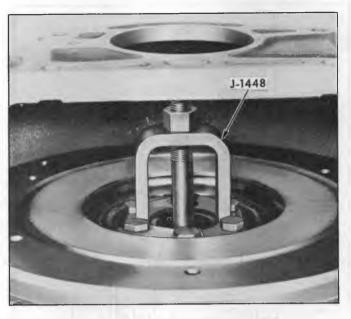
Clutch Pilot Bearing Removal (Typical)
